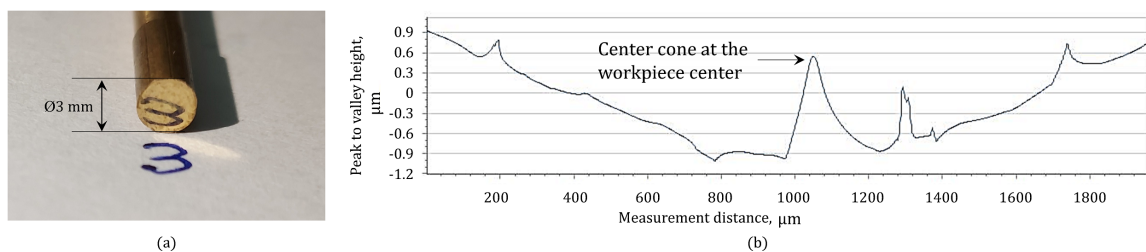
(a) Original machined surface generated on lead free brass sample by ultra-precision diamond turning; (b) Two-dimensional surface topography of the machined surface showing the center cone
